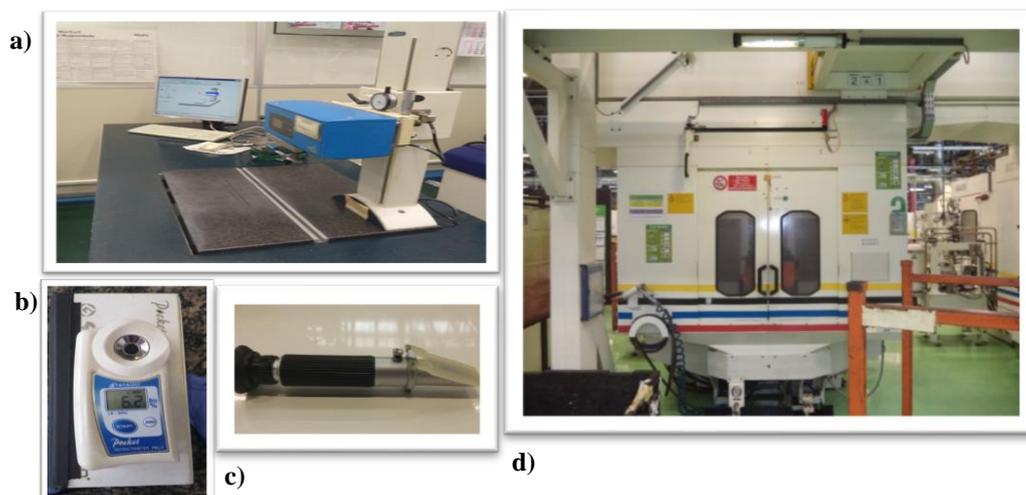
a) Rugosimeter Hommewerke, Waveliit 400 model; b) Digital refractometer Atago Pocket PAL-1; c) Benchtop refractometer brand Atago; d) CNC, Grob brand, BZ500T-105A Model
